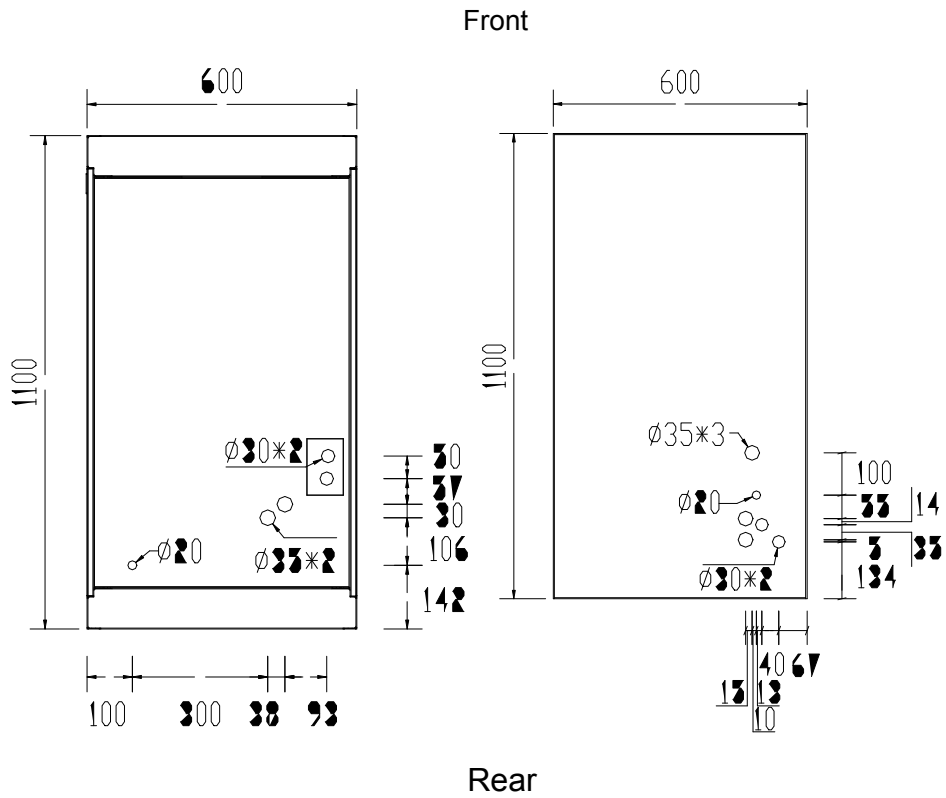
Dimensions of the Top Panel and Bottom Panel in 600mm front discharge unit (Left- Top Panel; Right- Bottom Panel)
